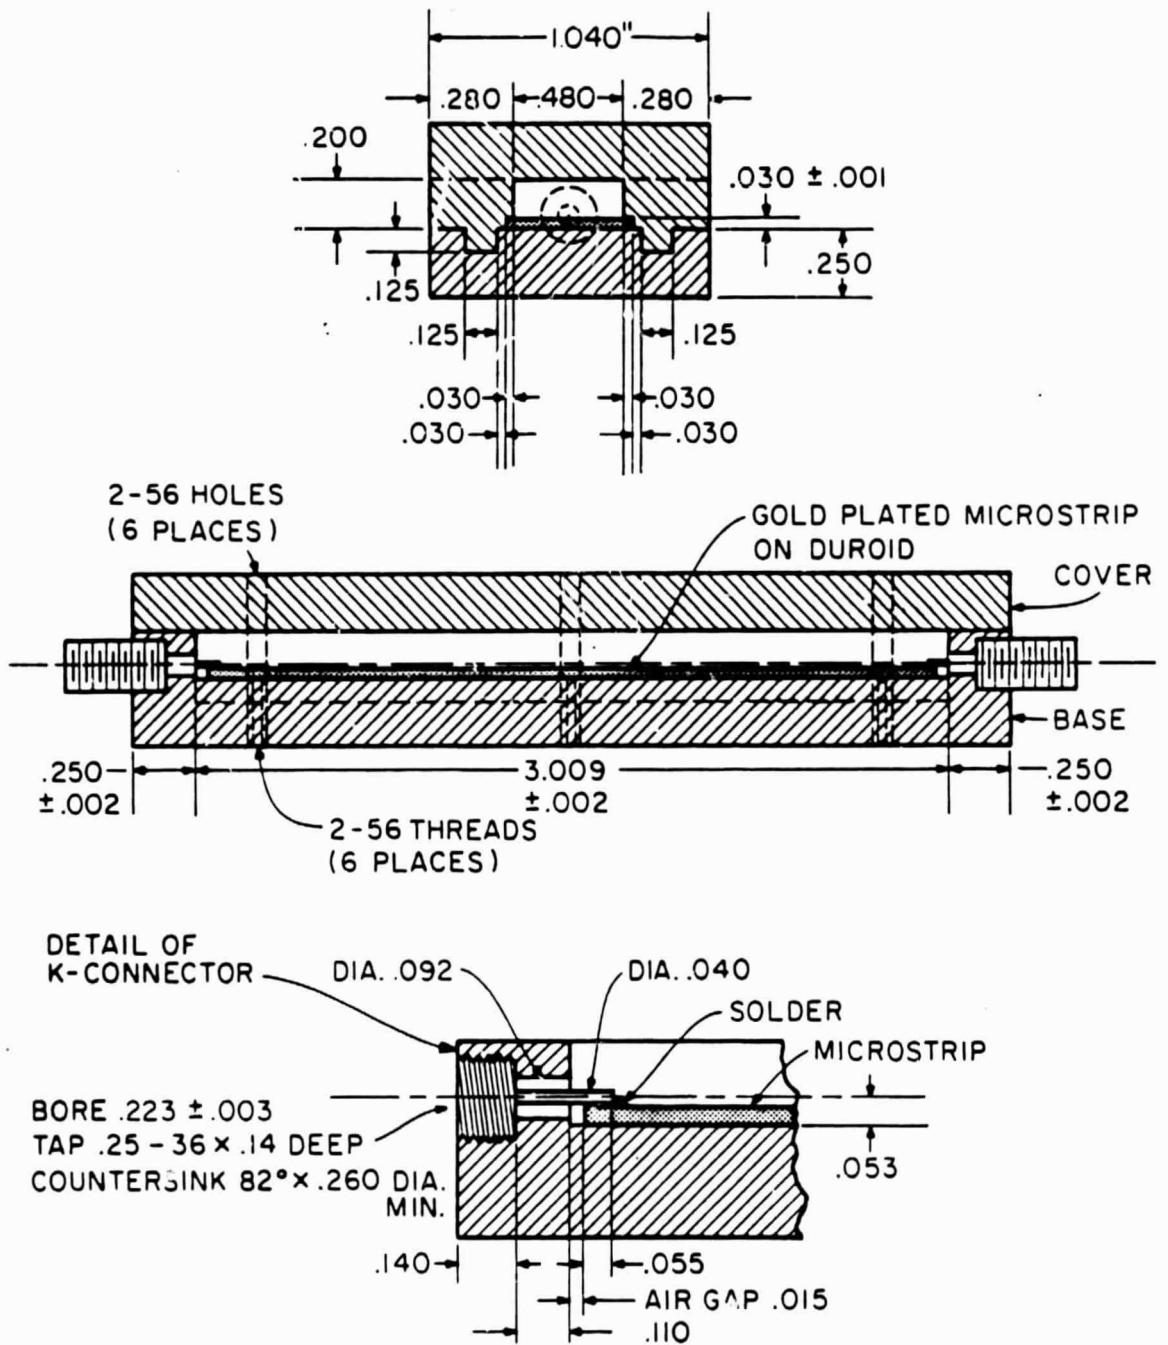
Machine drawing of test fixture. Note 0.015" compensation gap; this provides matching between connector and microstrip. All dimensions are in inches.
